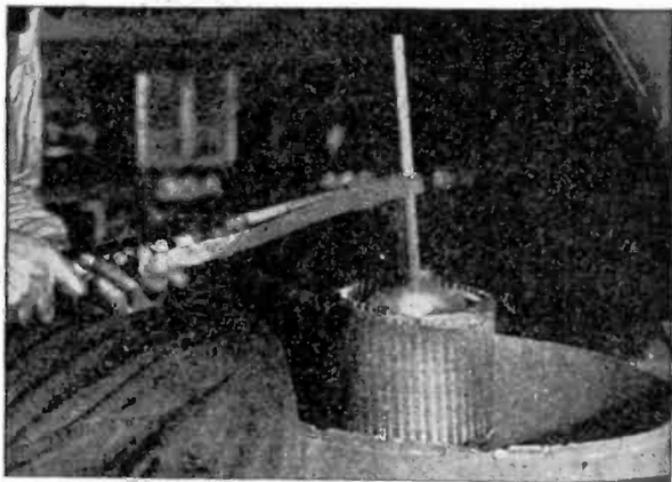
,545.—Reliance induction motor construction 11. Welding operation. Bars and end ring are welded into one solid mass to prevent loose connections.
